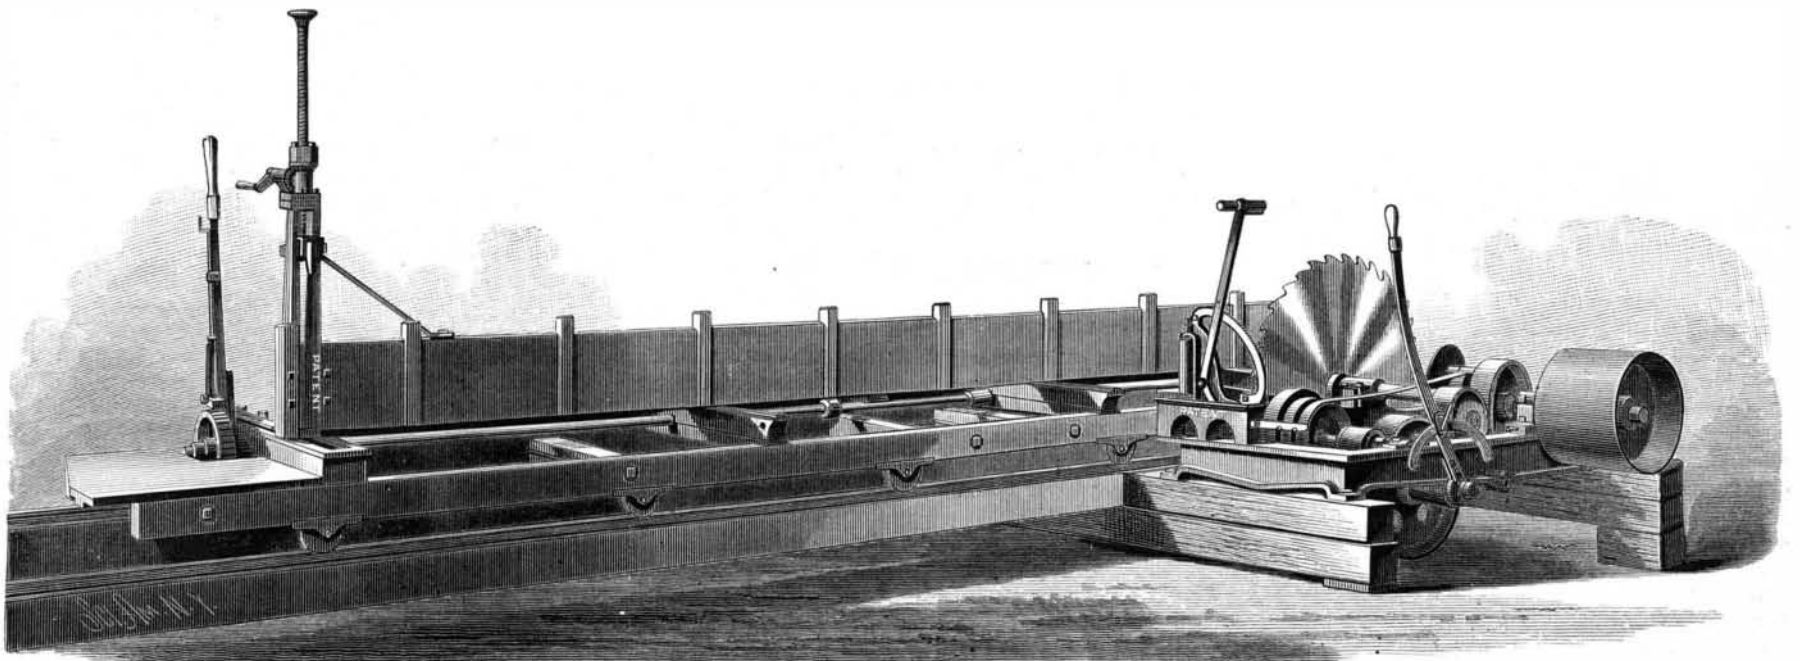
NEW CIRCULAR SAW MILL MADE BY THE TAYLOR MANUFACTURING COMPANY.
